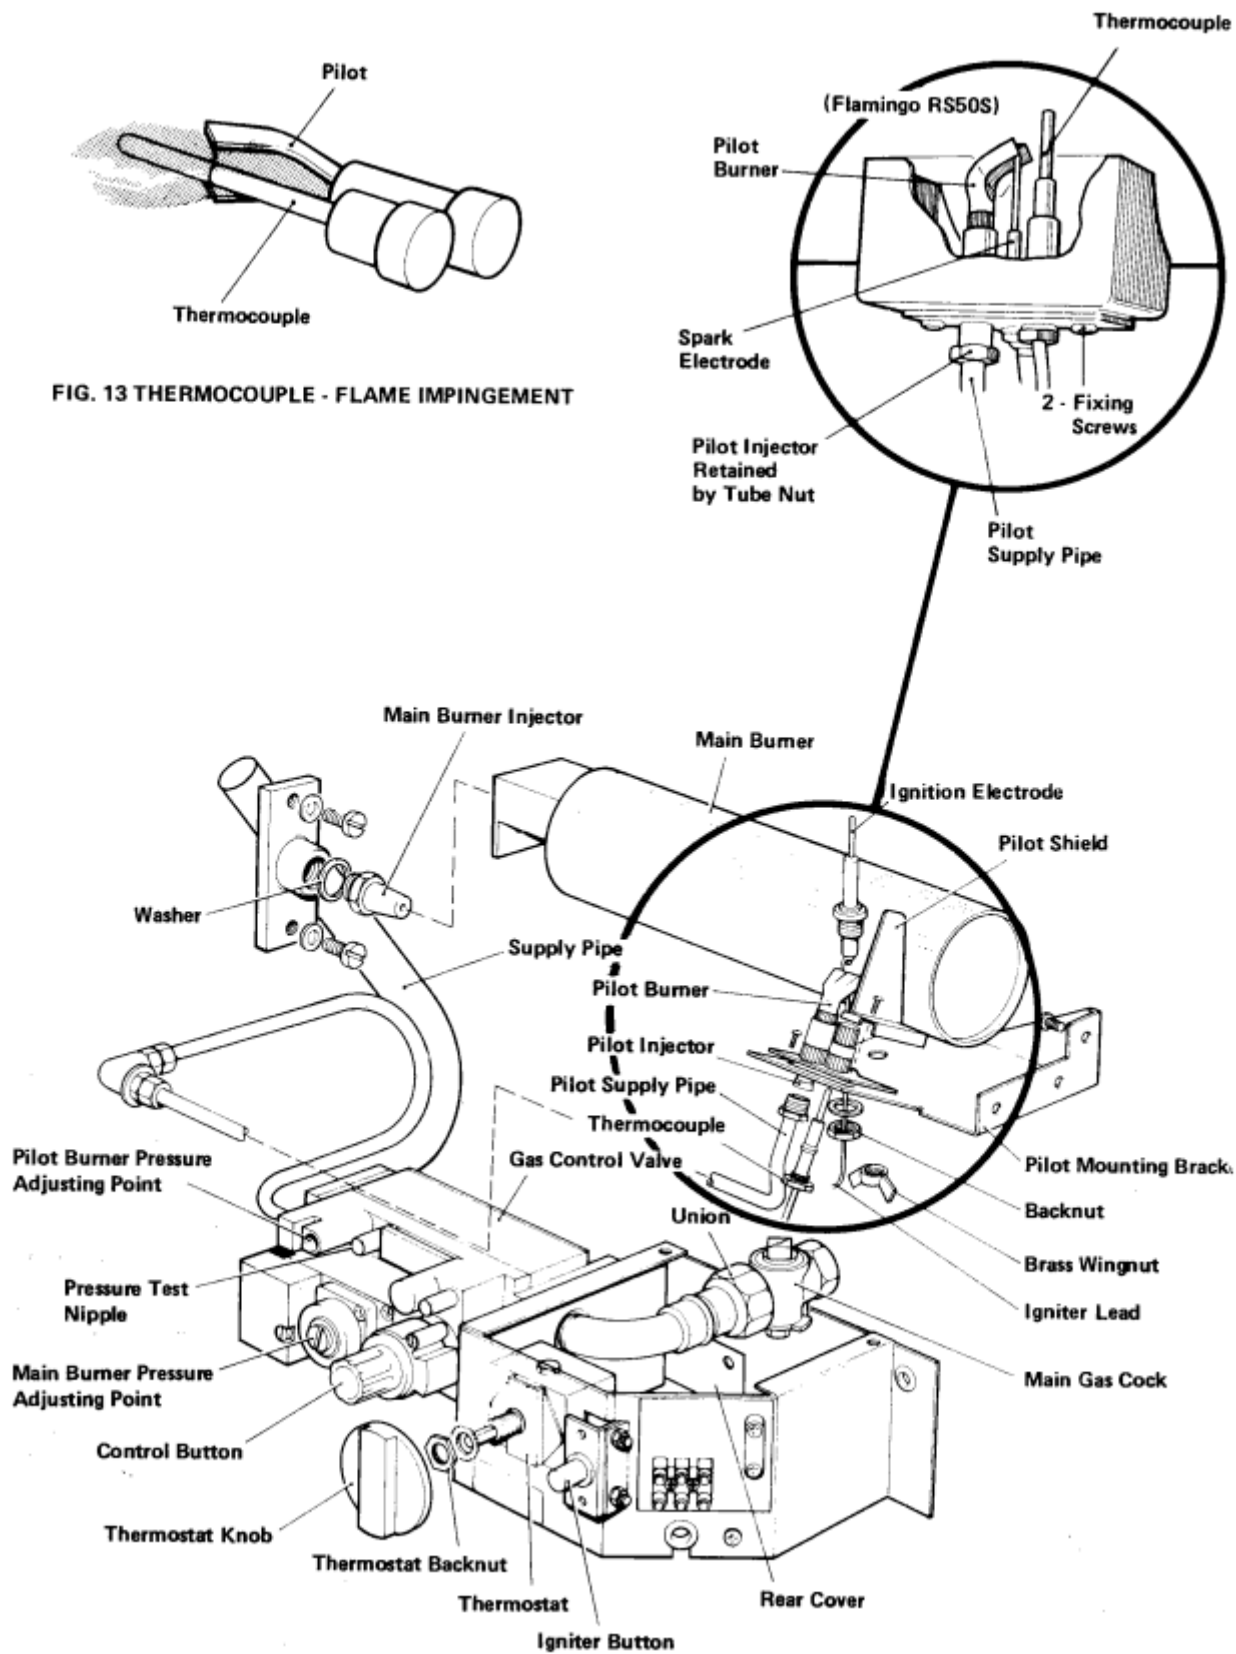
EXPLODED VIEW OF FLAMINGO COMPONENTS
